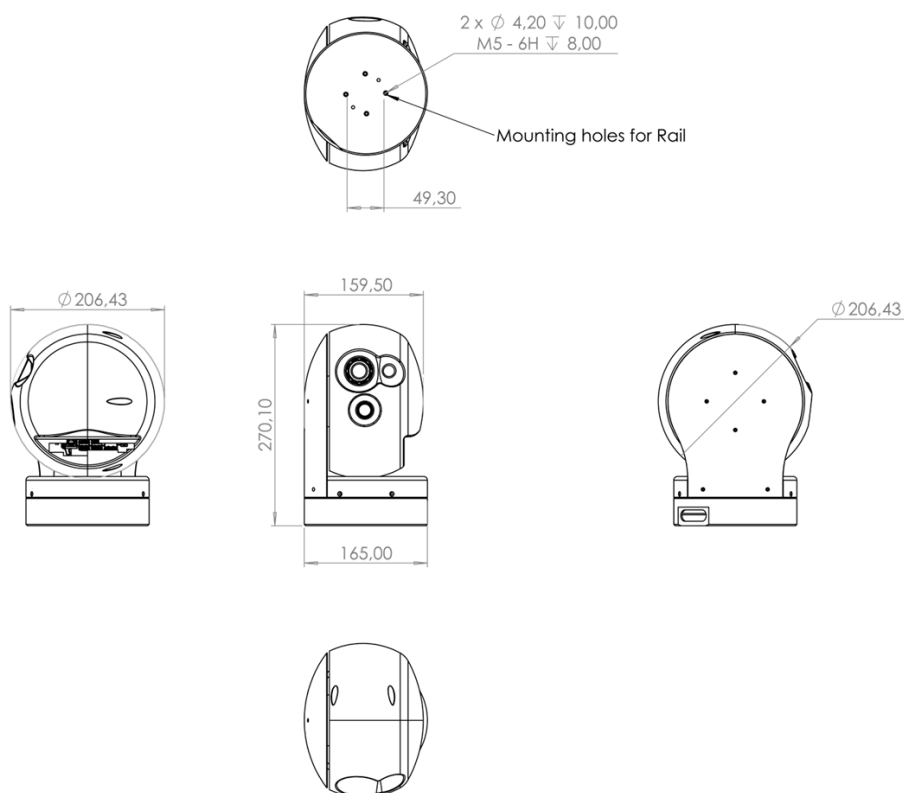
Mechanical drawings and rendering of the developed DronEL payload.
